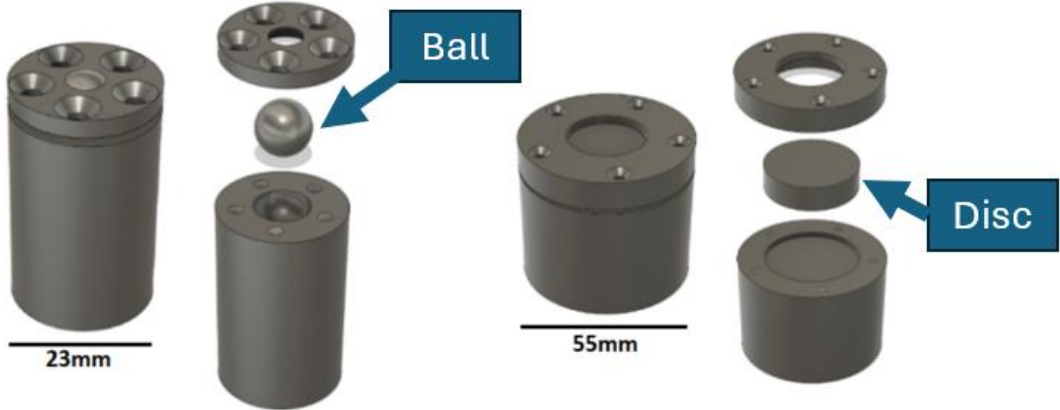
Exploded hammer (left) and sample holder (right) design.
